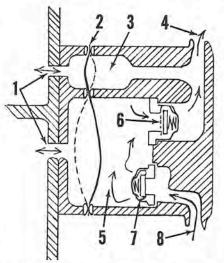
Schematic view of diaphragm type fuel pump. Pump body mounts on side of cylinder block and is ported to both crankcases as shown. Refer to text for details of operation.
